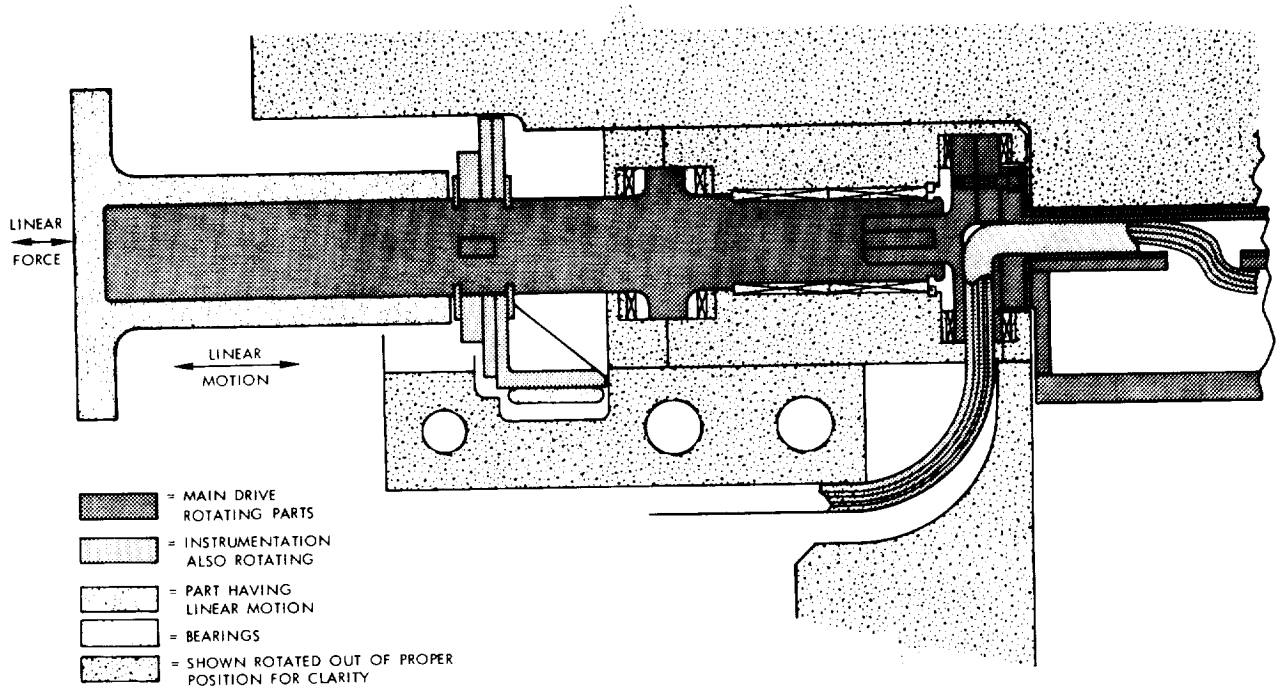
SURFACE & ACTUATOR ARRANGEMENT (LINEAR TO ROTARY MOTION)
